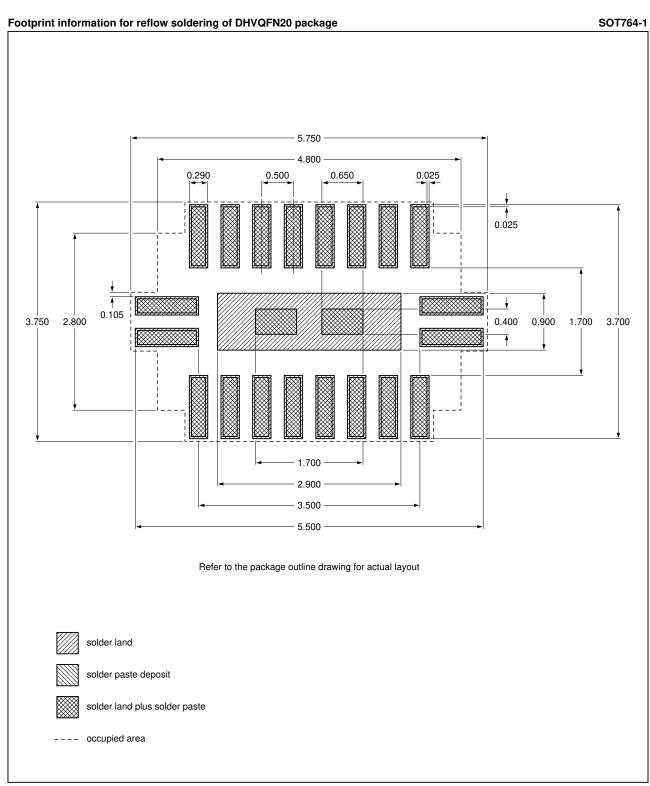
PCB footprint for SOT764-1 (DHVQFN20); reflow soldering
